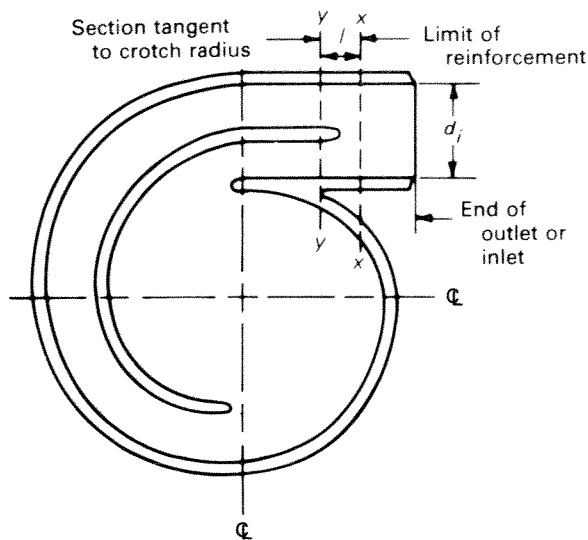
MINIMUM TANGENTIAL INLET AND OUTLET WALL THICKNESS
